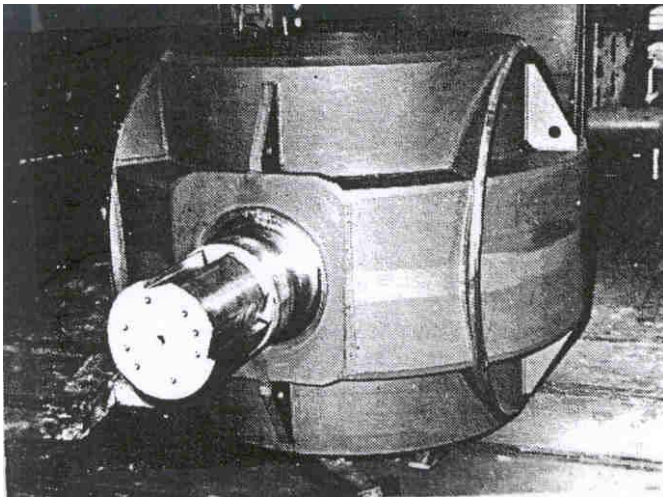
Valve rotor (Courtesy of Kvaerner Brug)
